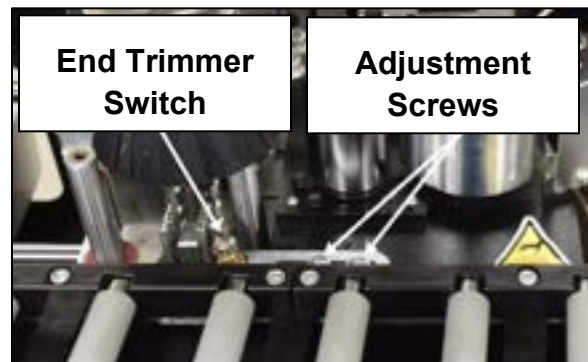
End Trimmer Limit Switch and Adjustment Screws
